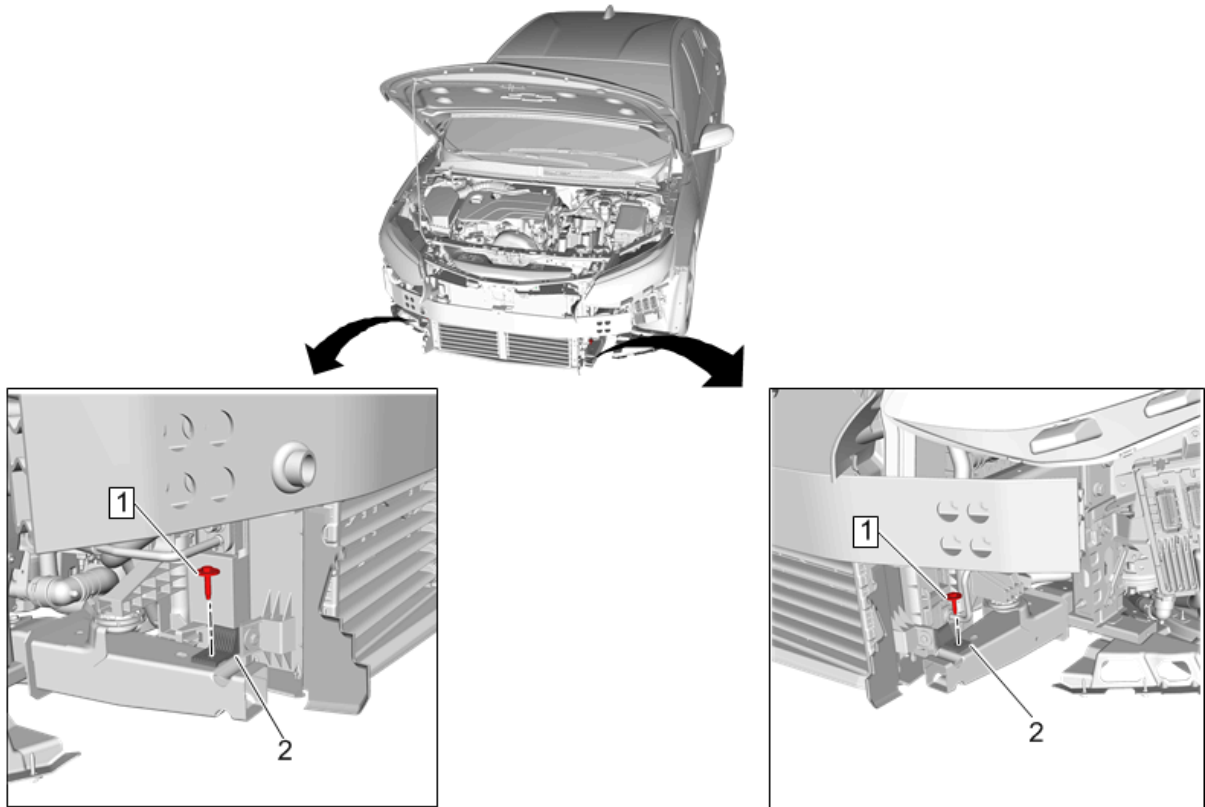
Radiator Air Side Baffle Bolt And Radiator Air Lower Baffle Bracket
